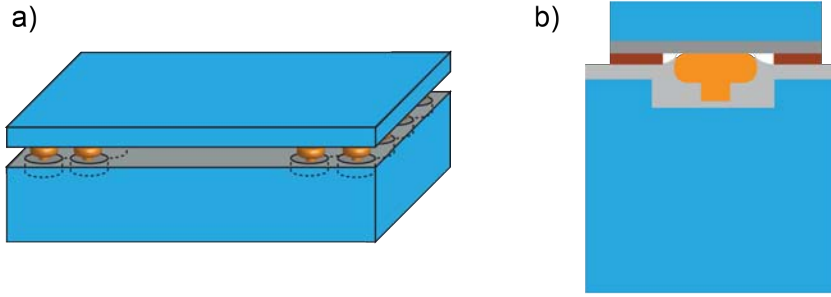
Usage of template 3: (a) Position chip on template with ball bonds facing shallow holes; cross section of soldered ball bond (b).
